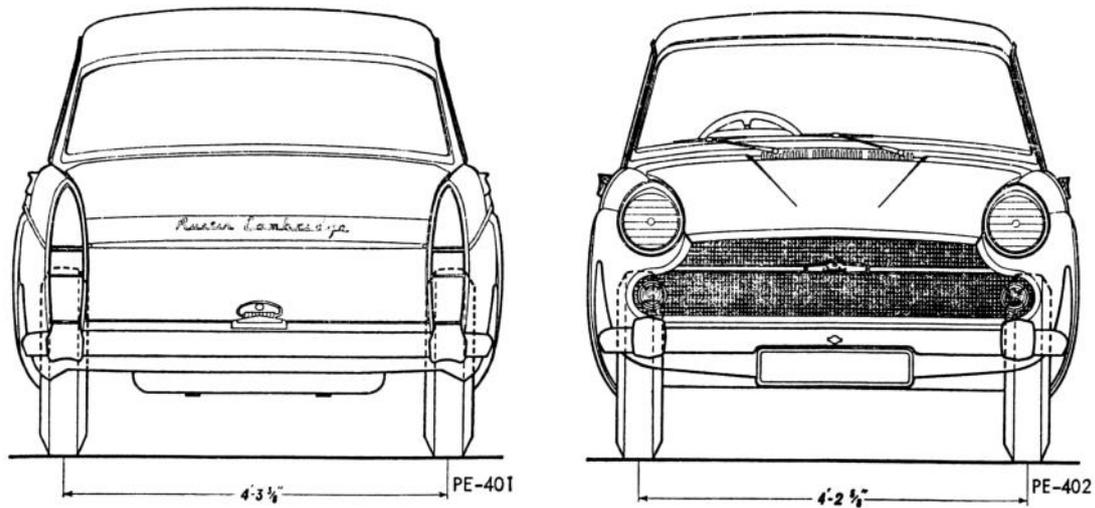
BMC ADO.38, front and rear elevation, typical (Austin shown)
